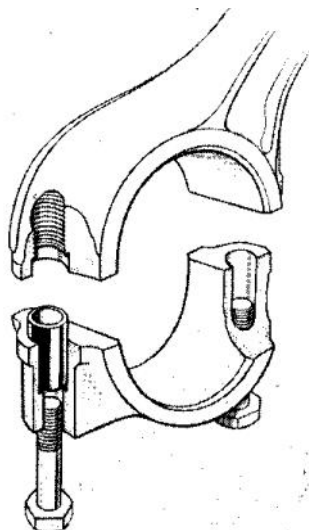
Connecting Rod: Dowel locating the Big End Cap
